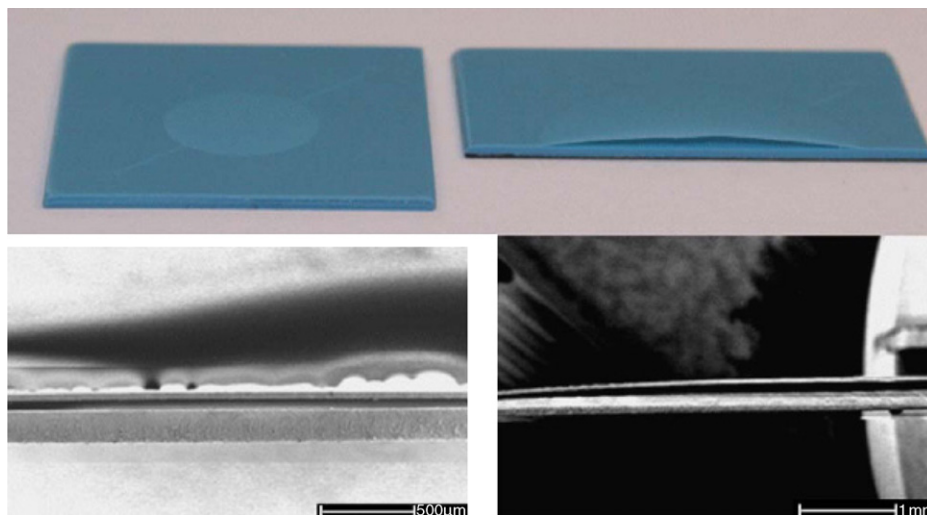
Optical and SEM pictures of flat 7 mm-diameter (left top and bottom) and swollen 14 mm-diameter LTCC membranes (right top and bottom) fabricated using a lamination technique with carbon material.<sup>40</sup>
